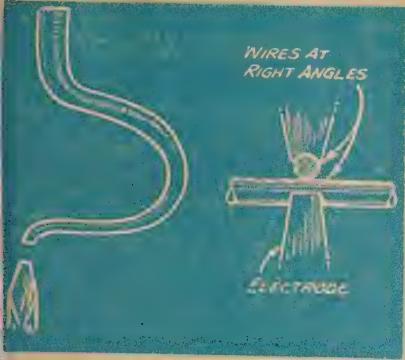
(Left) Swan-neck electrodes. Fig. 7 Position of electrodes for wire welding.
